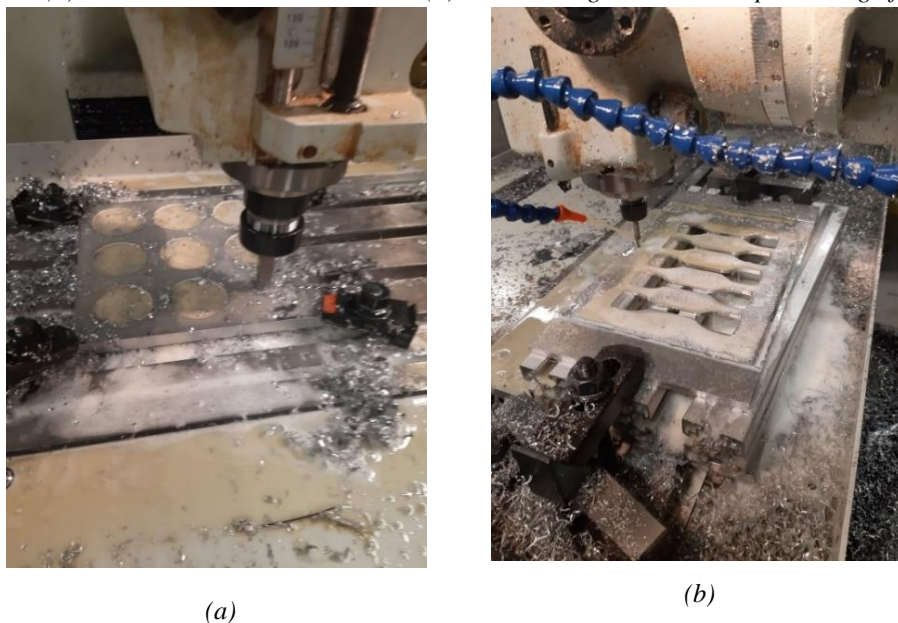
CNC machining process of (a) water absorption, (b) tensile moulds manufacturing
